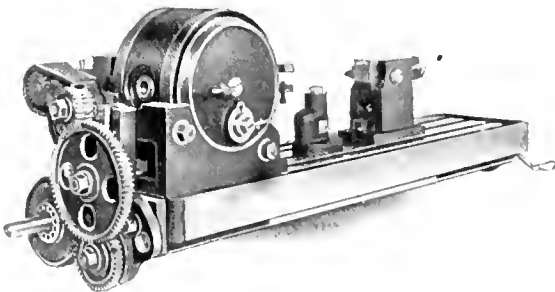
Dividing Head for Universal Milling Machine with Tailstock and Center Rest
